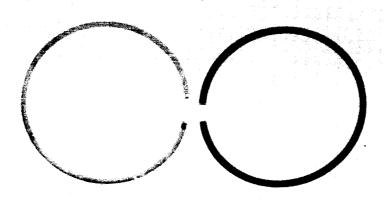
Engine Compression Rings, New Ring (left), Set Ring (right)
